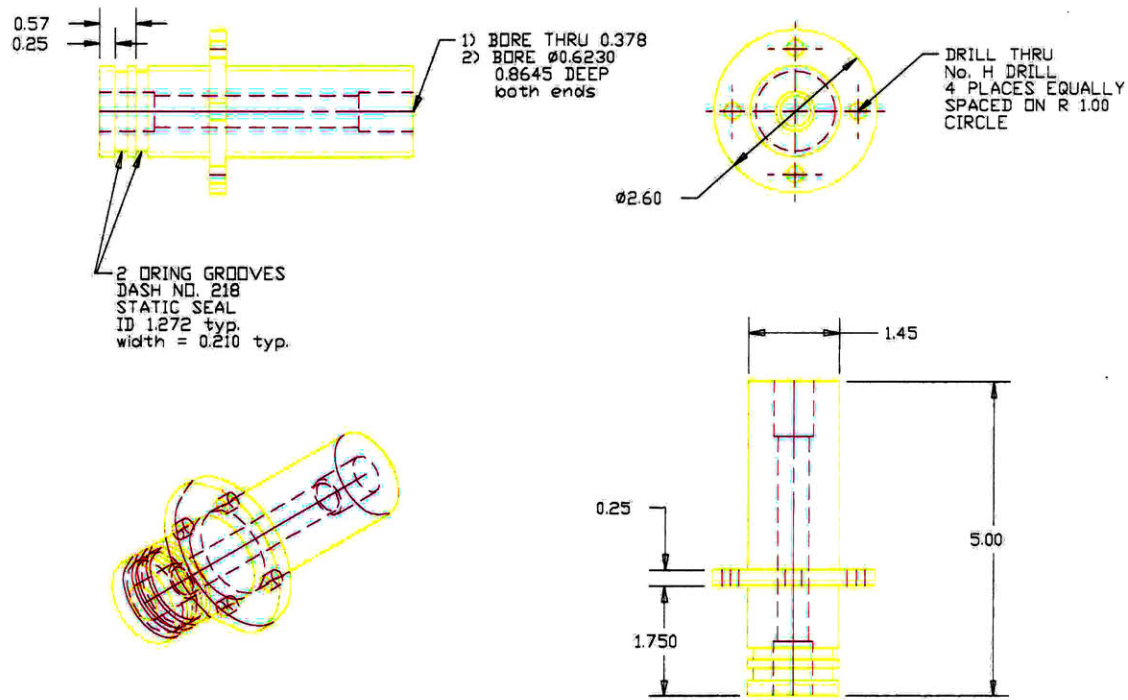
Drawing of the linear bearing housing. Clockwise from top left: side view A, top view, side view B (this is the actual orientation of the piece), and isometric view. The material is aluminum and the frelon lined bearings fit one at each end. The flange acts to secure the housing to the base plate. All dimensions are in inches.
